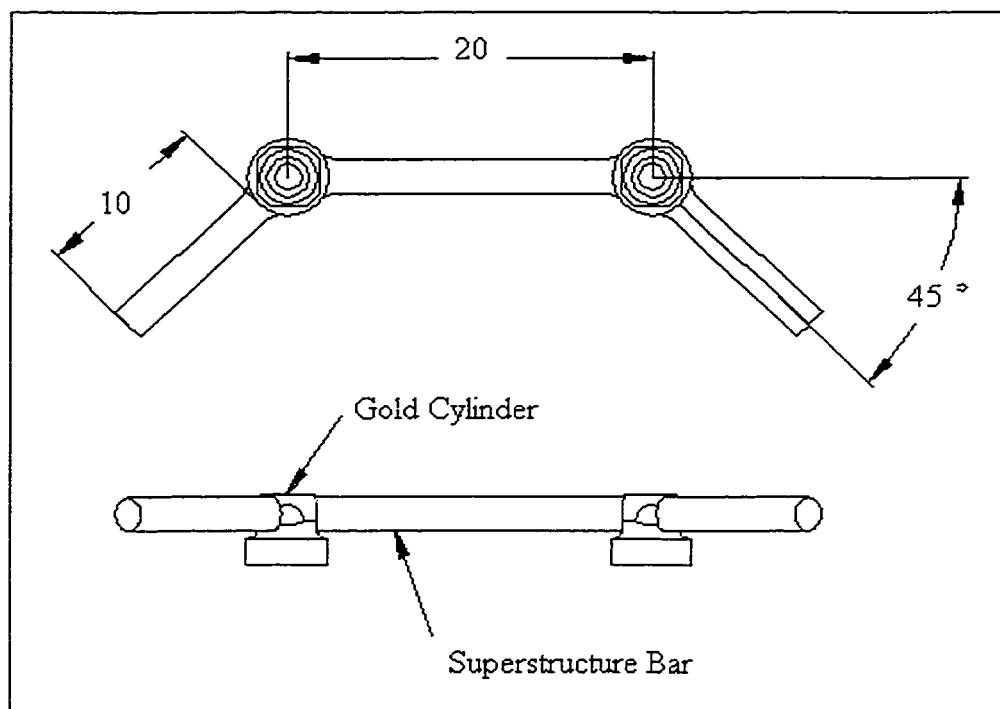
Typical Centric Prefabricated Bar Superstructure, all linear dimensions are in mm.
